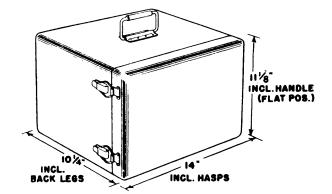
RF Signal Generator Set AN/URM-25B, Outline Dimensional Drawing
